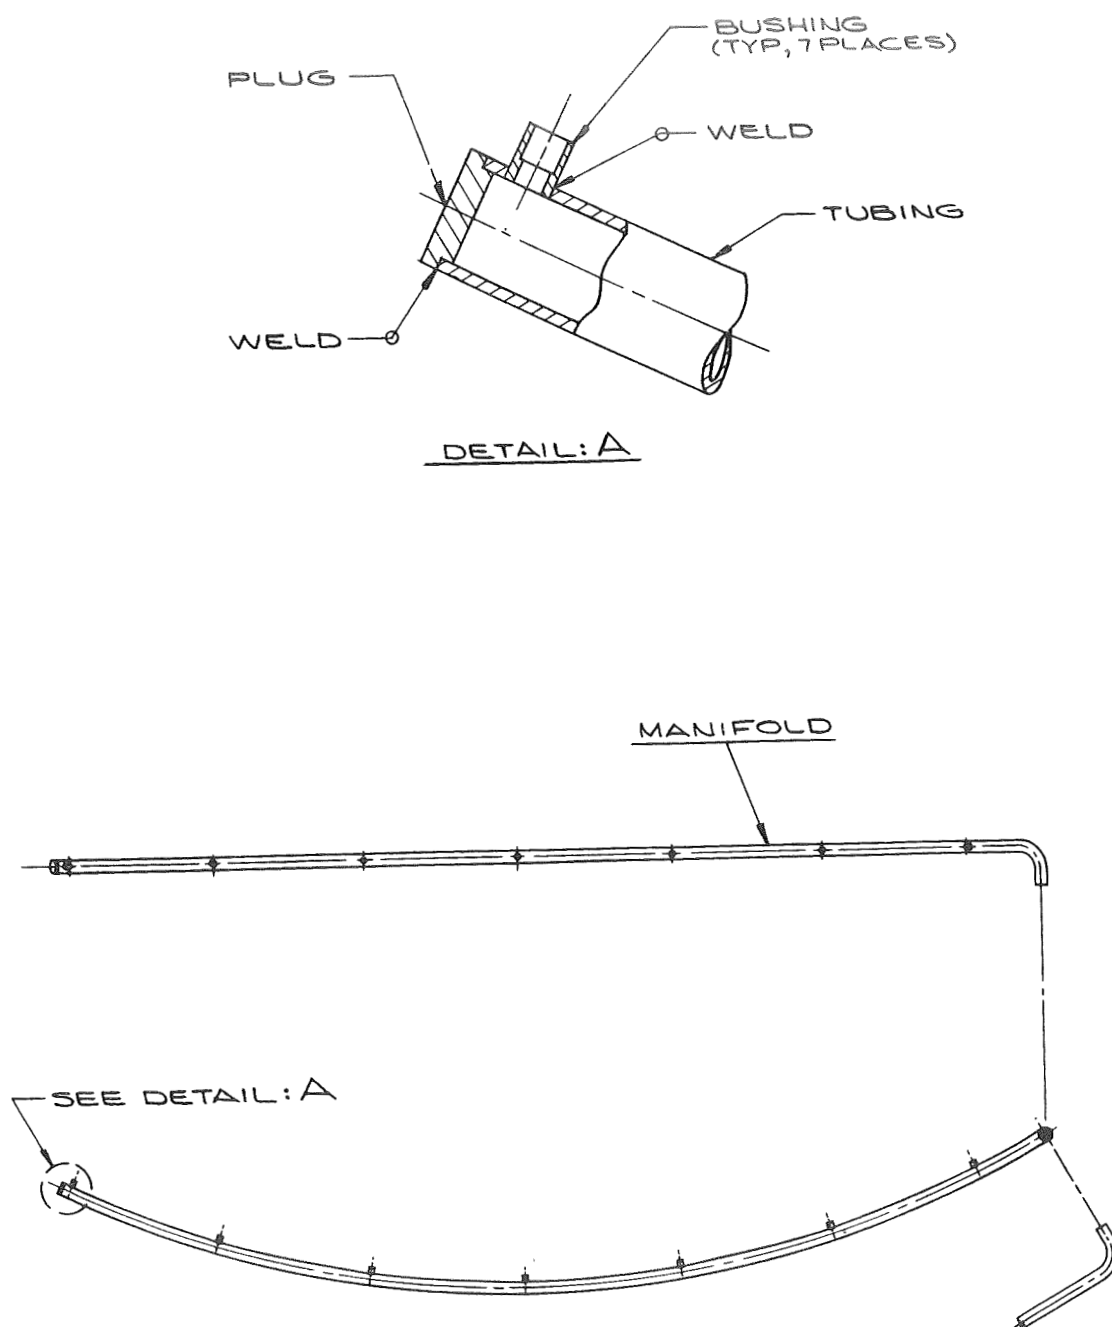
Conduction Fin Radiator Assembly Sequence Step 3
